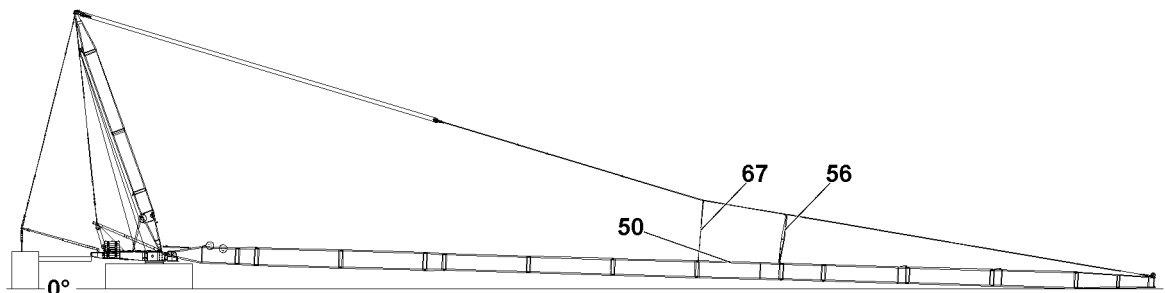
The boom system with the auxiliary guying frame and auxiliary guying
